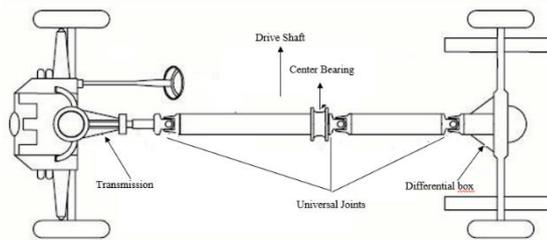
Two-Piece Driveshaft in a Rear Wheel Drive Vehicle^[10]
